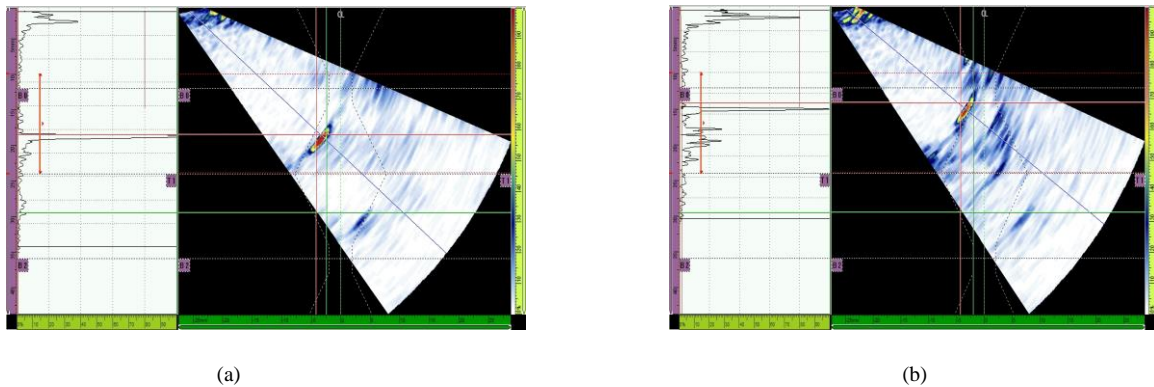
Sectorial scan of weld in sample 4 (a) at the starting of weld and (b) at the end of weld
